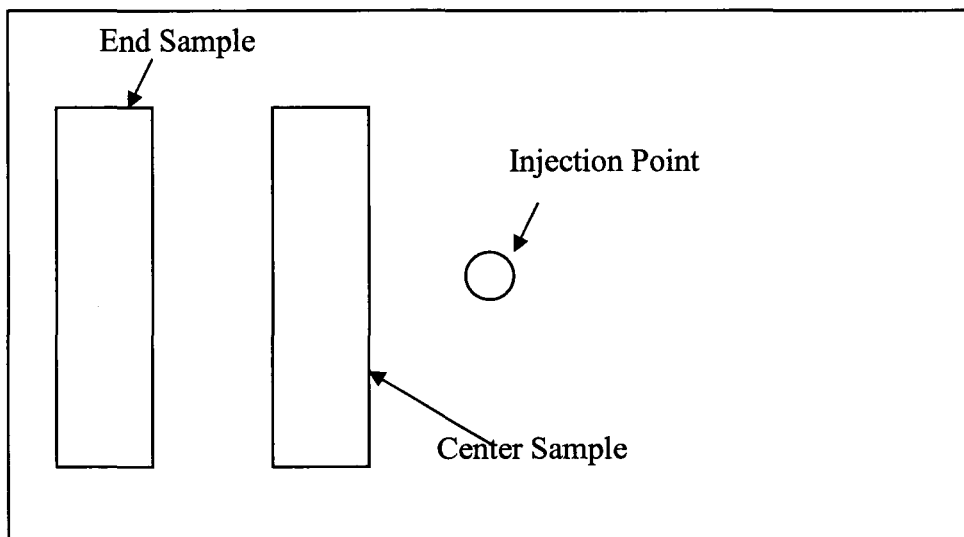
Mechanical analysis specimens. Locations of specimens punched from an injection molded plaque to be used for mechanical analysis.
